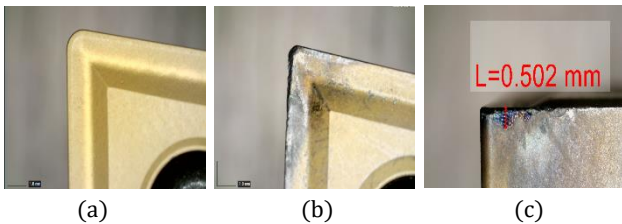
Turning insert (a) normal, top surface (b)wear, top surface (c) wear, side surface
